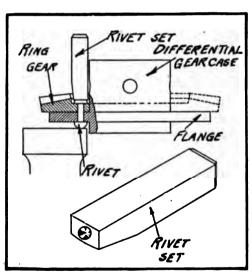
How to Rivet Driving Gear to Differential Gear Case.
